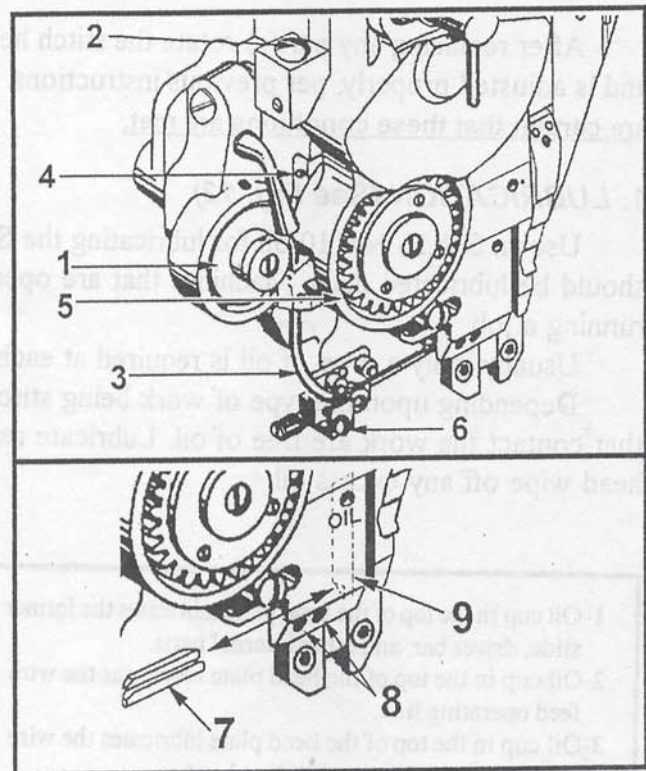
Inspecting Wire Feed Gears, Tubes and Stationary Cutter
